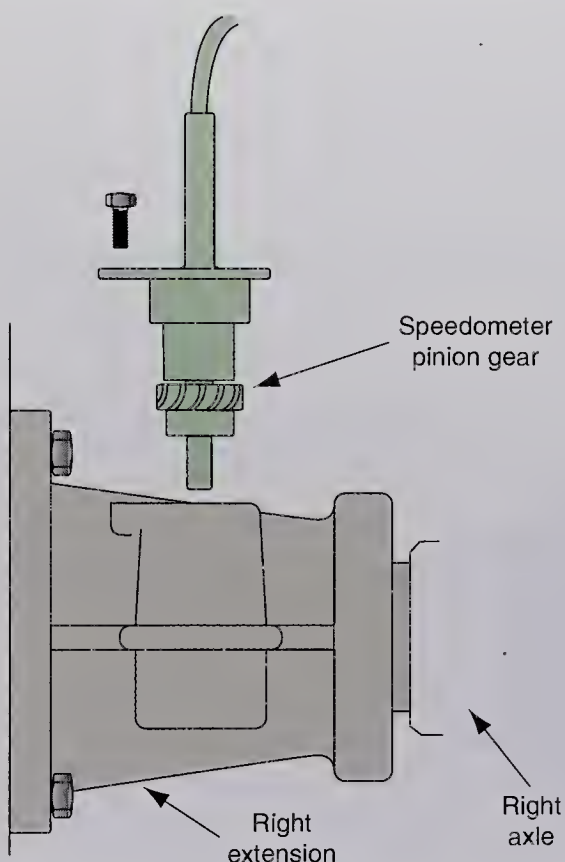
Speedometer drive gear removal before right axle removal.
